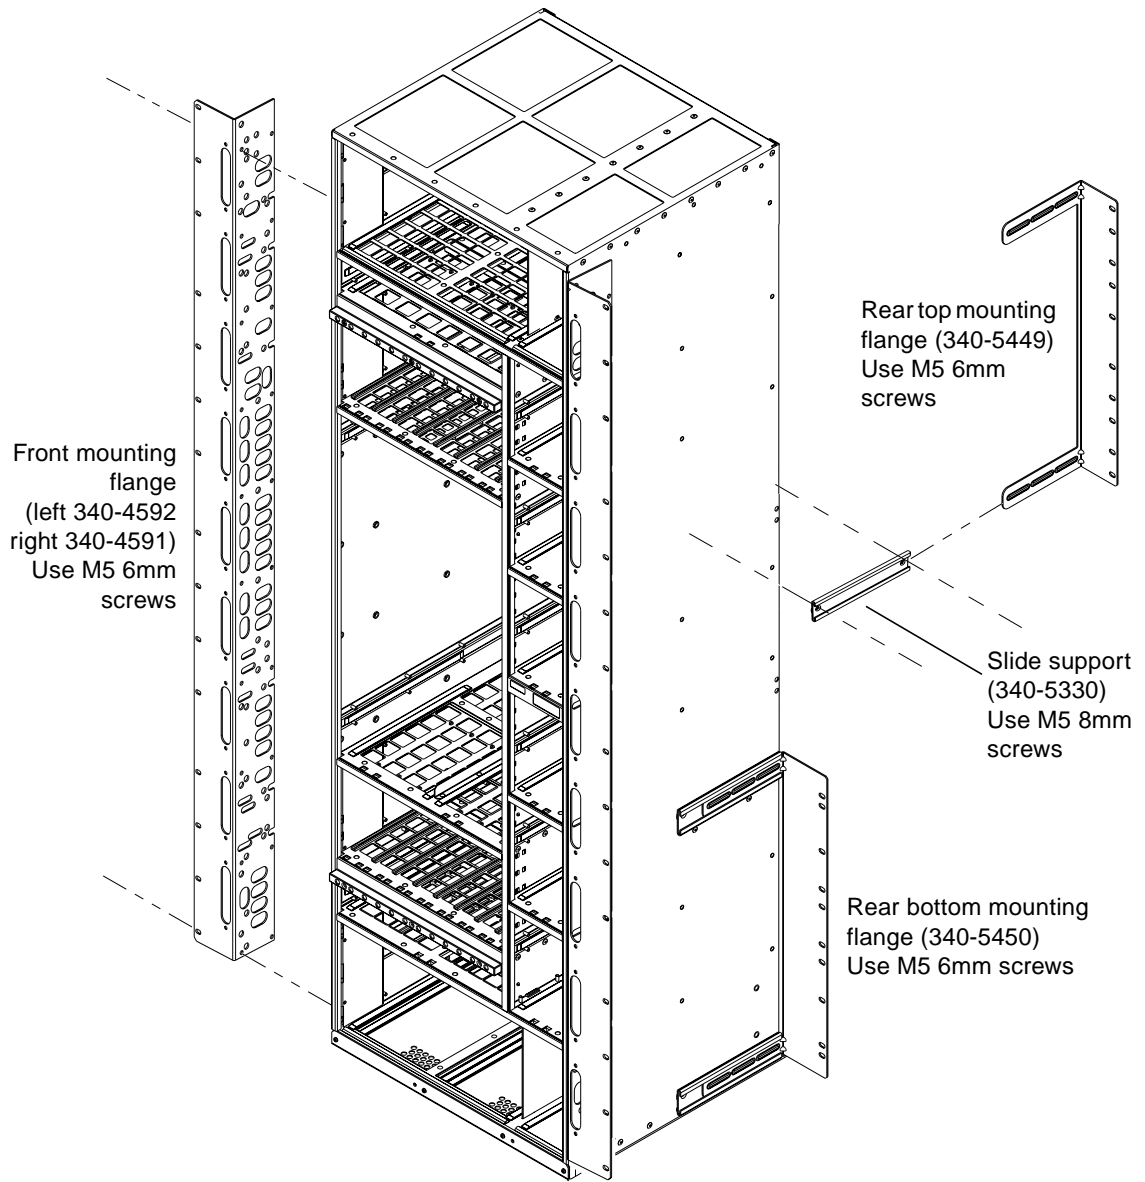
23-inch Rack Mounting Flange Kit
